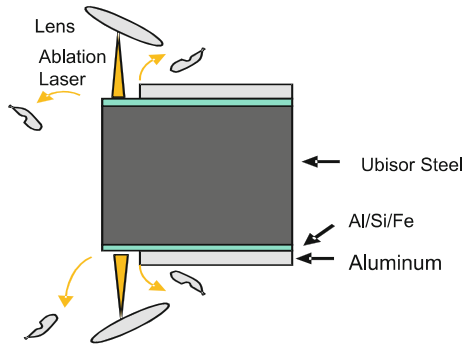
Laser ablation is used to remove the coating around the weld zones [23]
